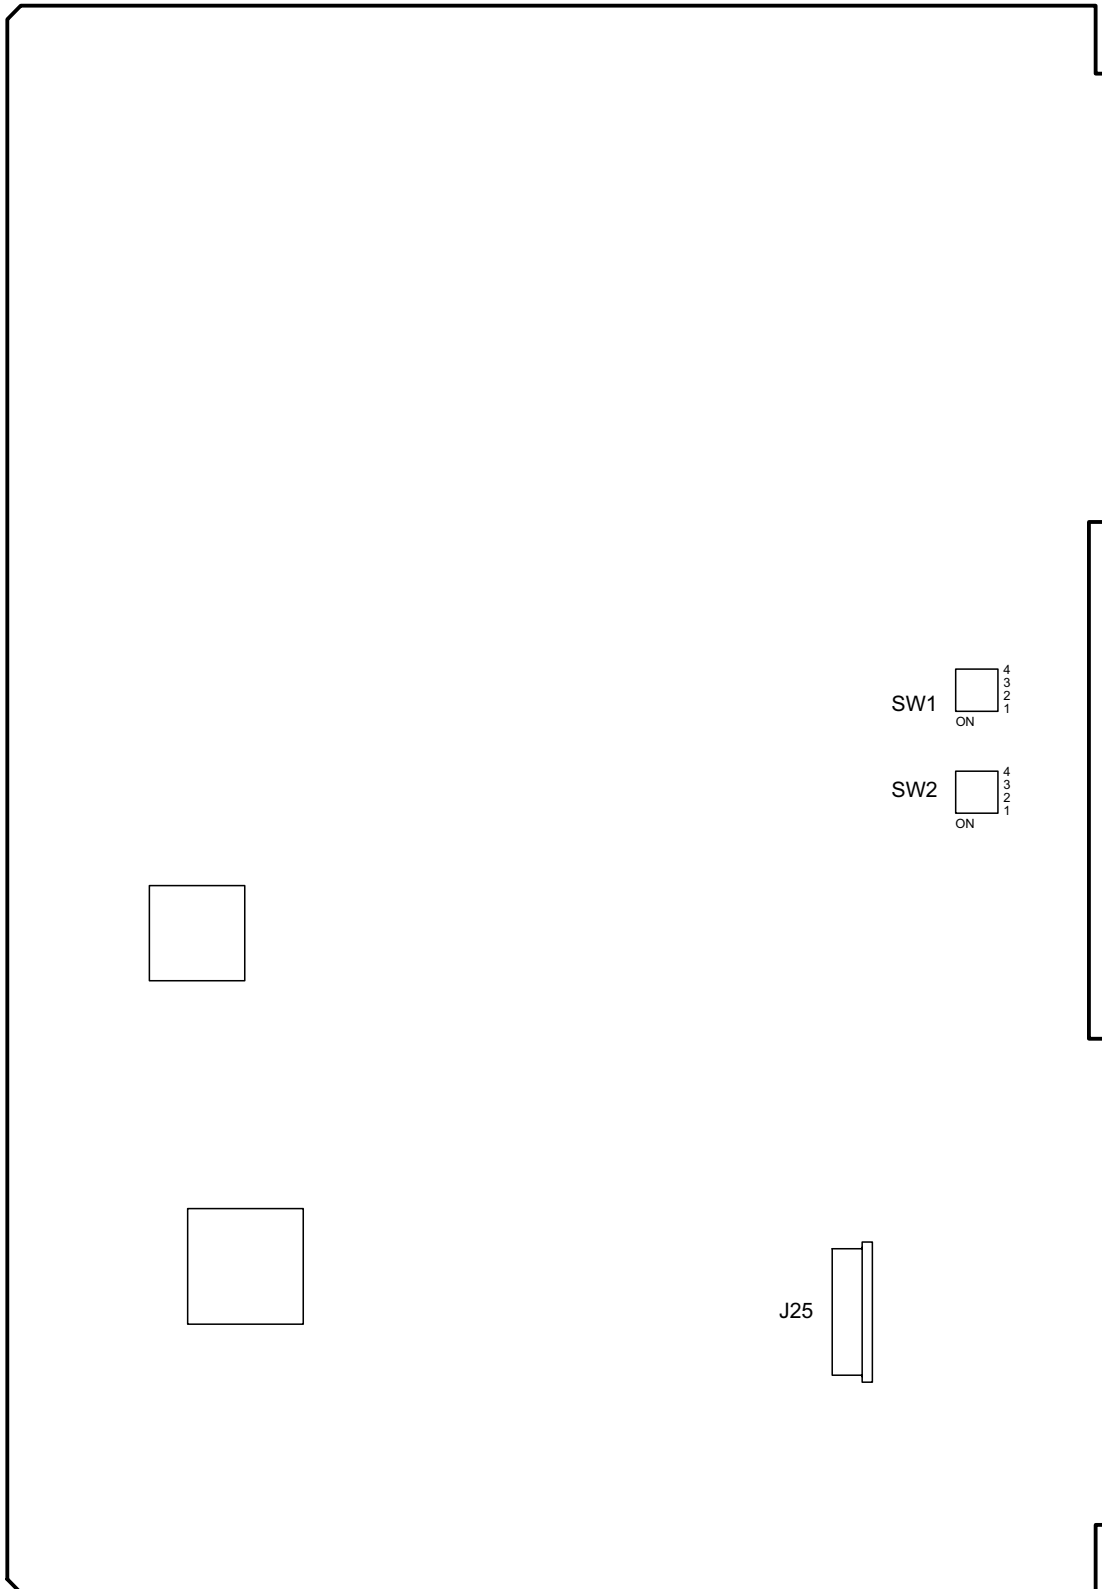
4 HP CP6005(X)-SA Board Layout (Bottom View)
